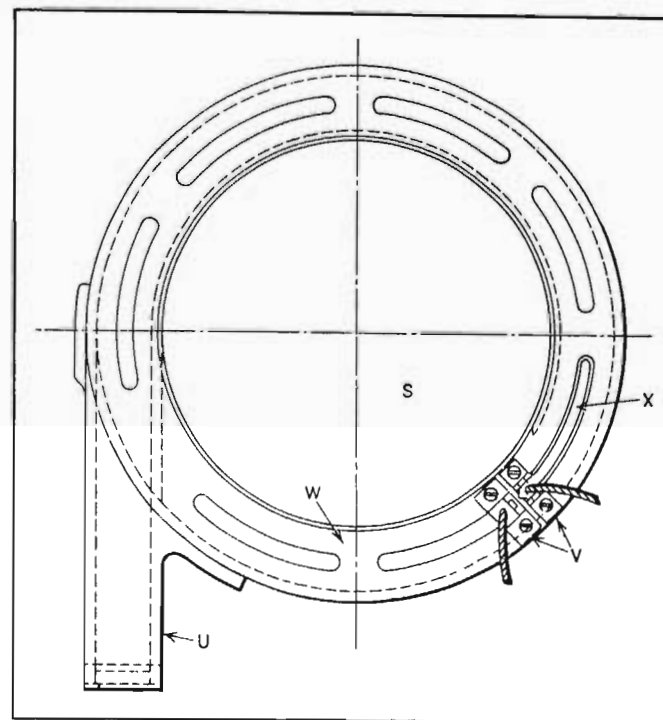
Plan view of disc *S*, Fig. 13, showing finger *X* that completes electrical circuit, stopping feed when disc *S* becomes overloaded due to clogging of machine.
